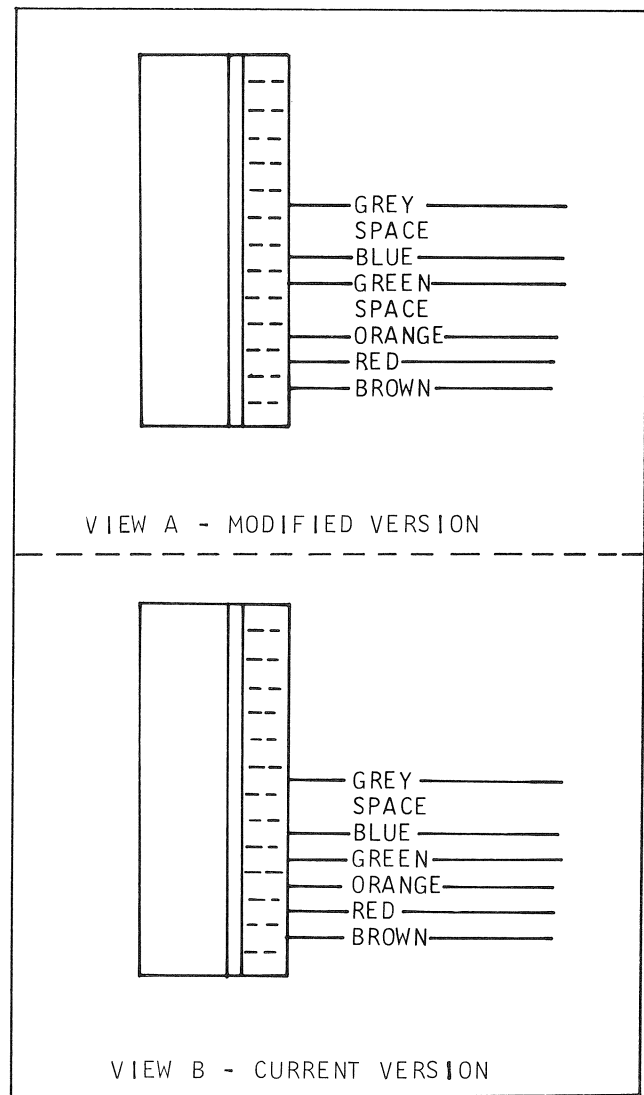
Figure C. Modified and Current Edge Connector Wiring for Design 1742
